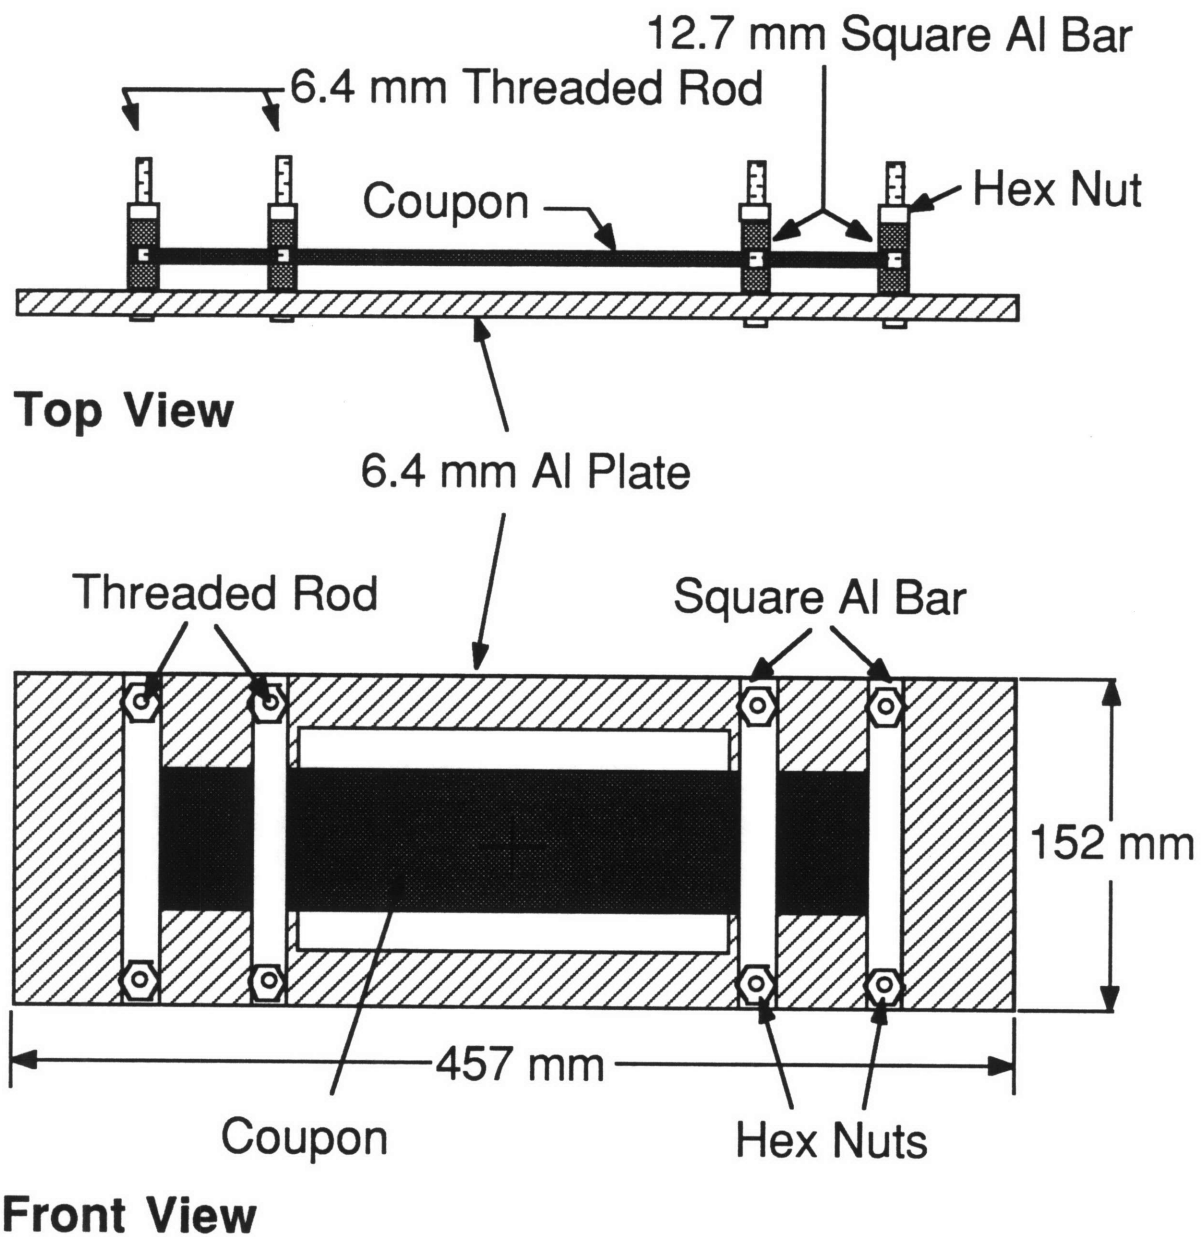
Illustration of Coupon Holding Jig for Impact Tests.
